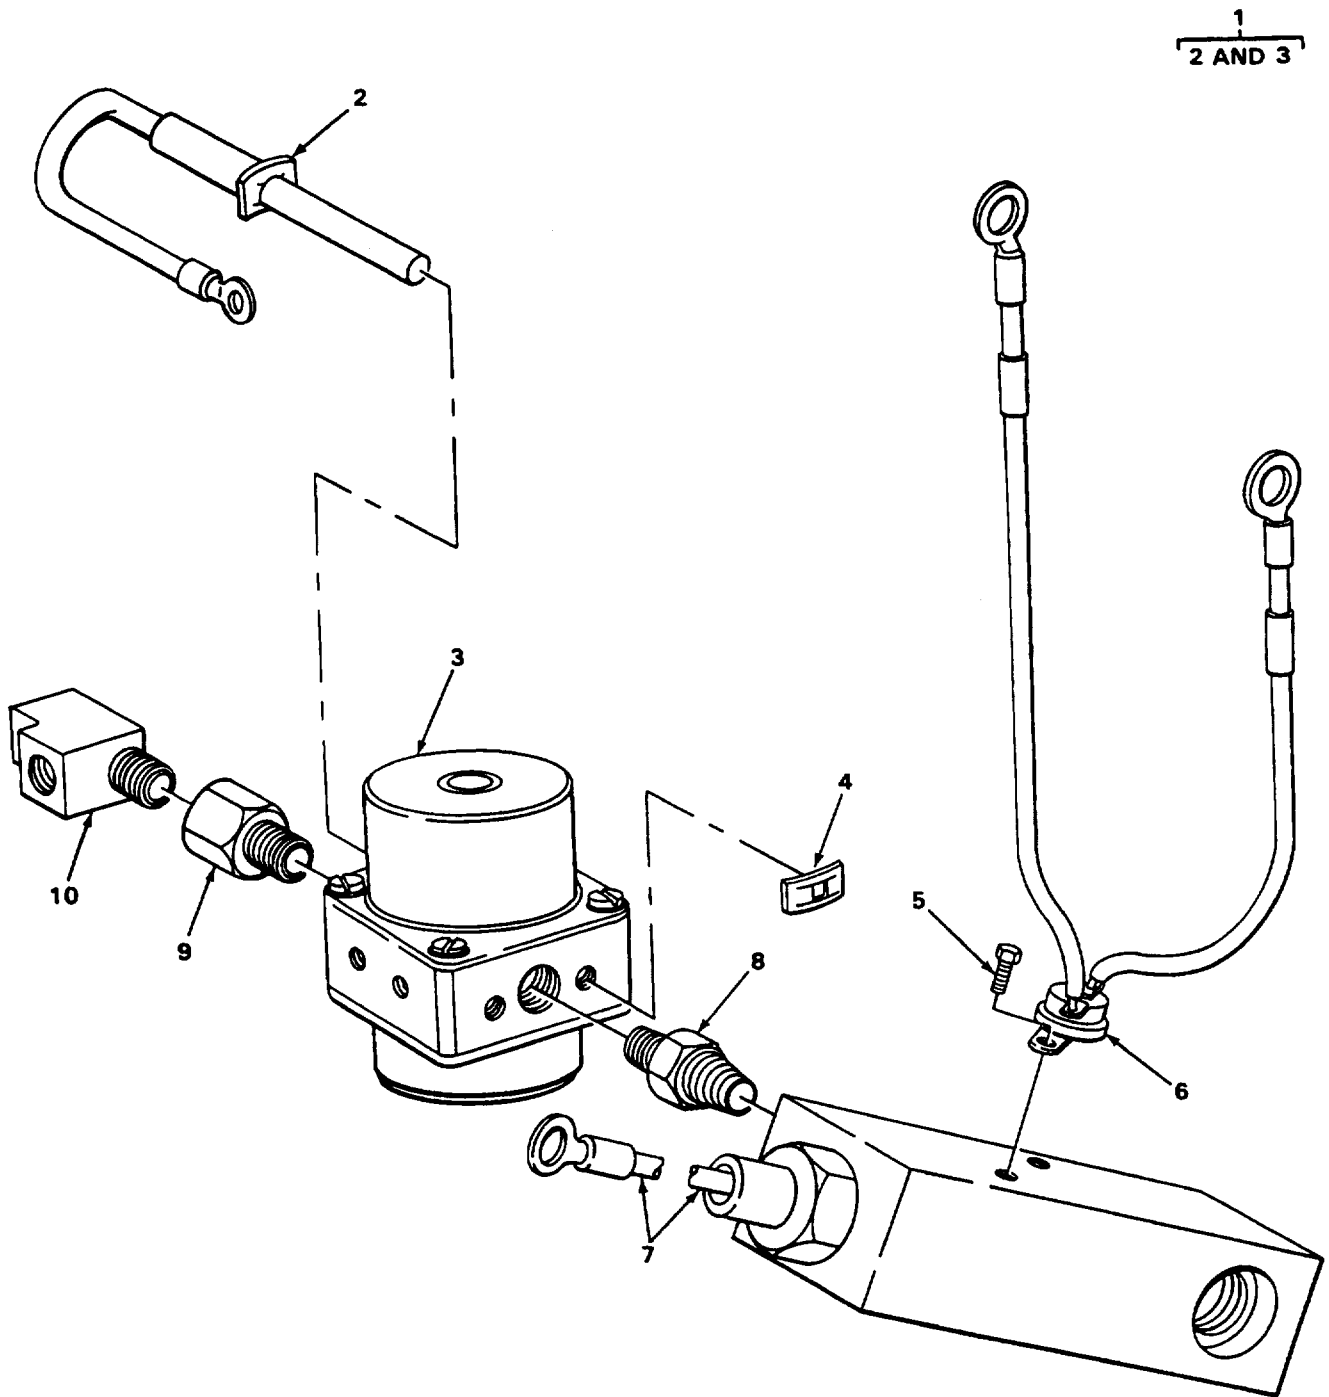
HUPP MODEL FUEL REGULATOR VALVE ASSEMBLY.
